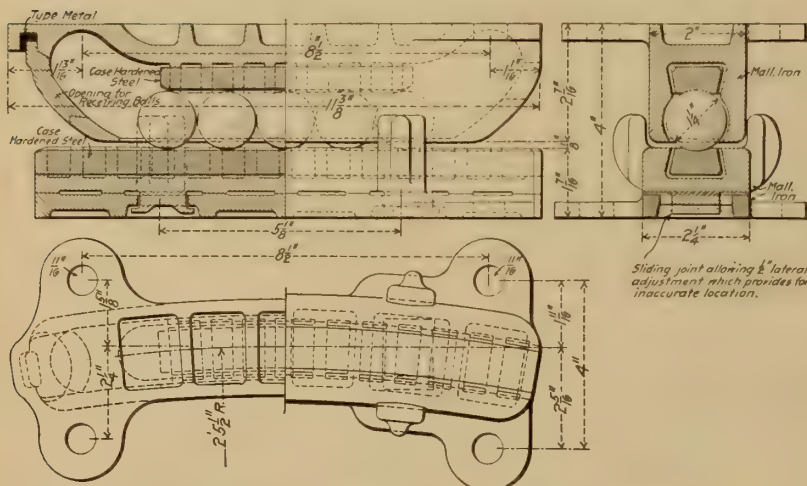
SINGLE ROLLER SIDE BEARING.
